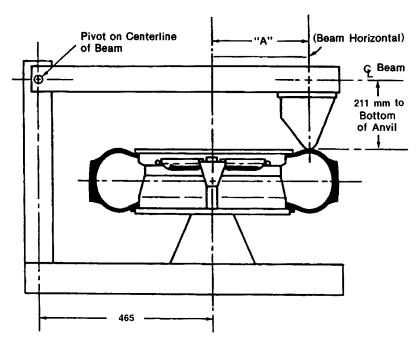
Bead Unseating Fixture Ail dimensions in millimeters (mm)
